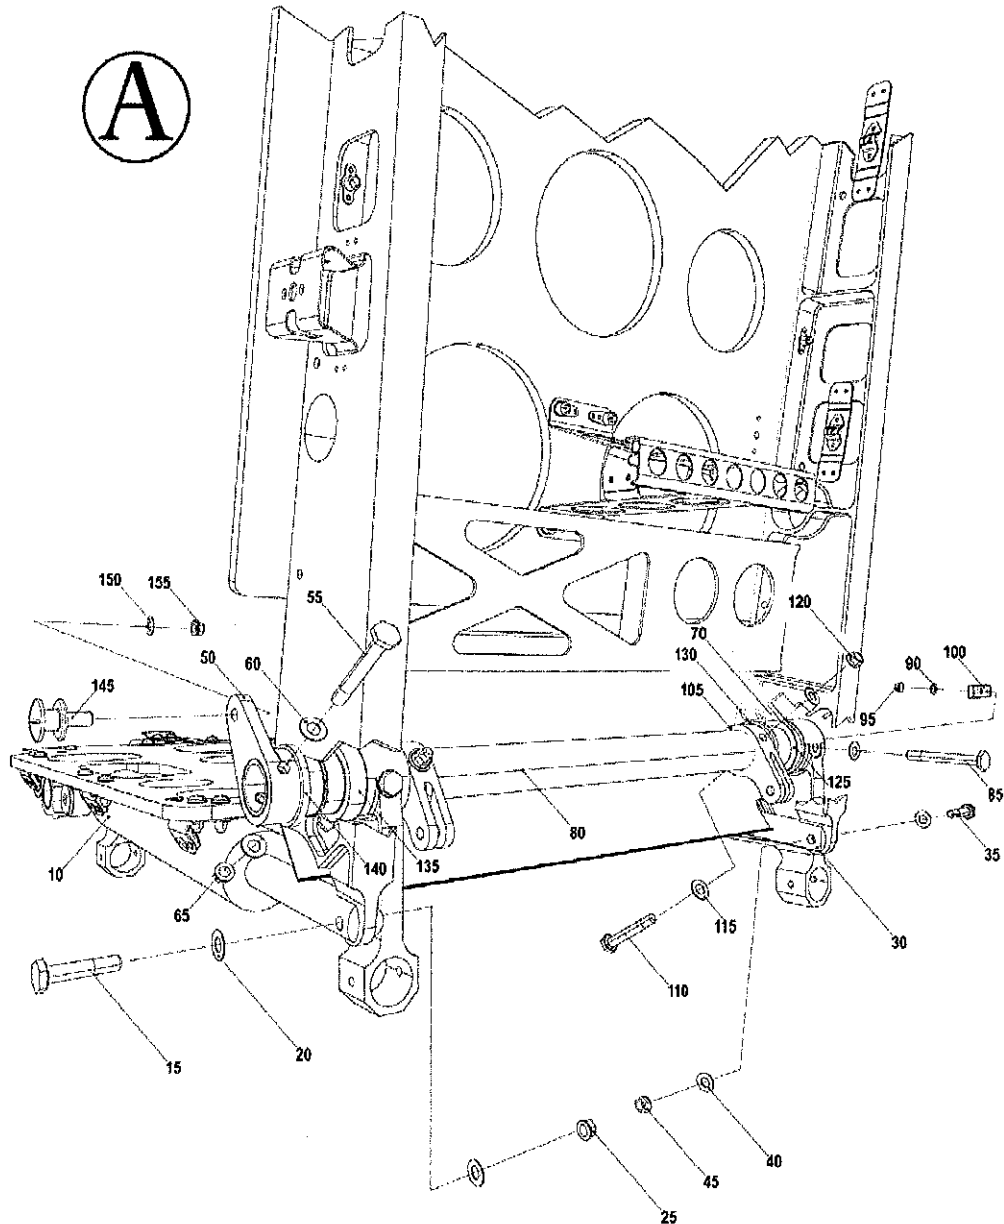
SHEET 2 UPPER SEAT ASSEMBLY
